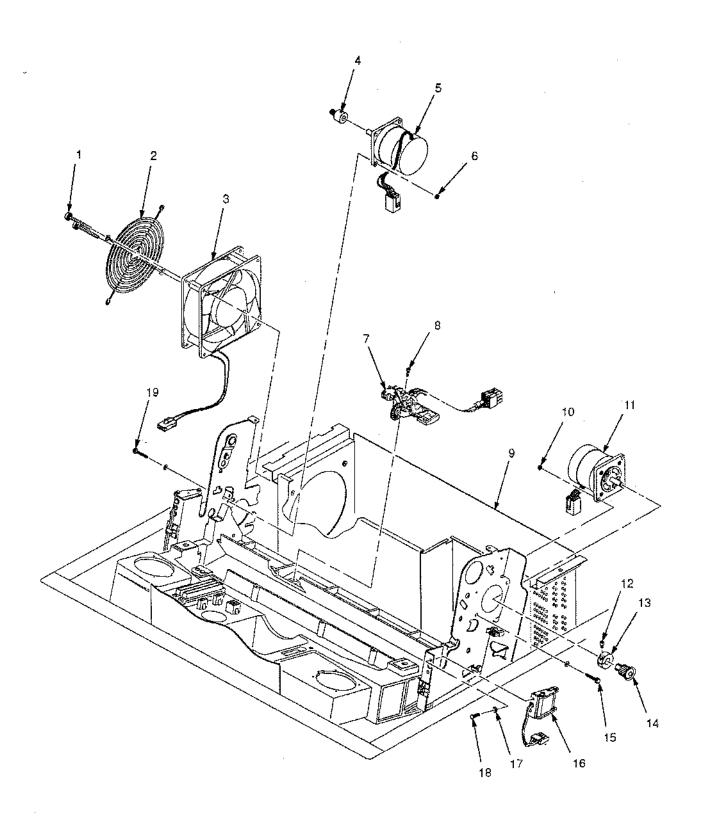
Motors, Card Cage Fan, and Paper Detector Switch
